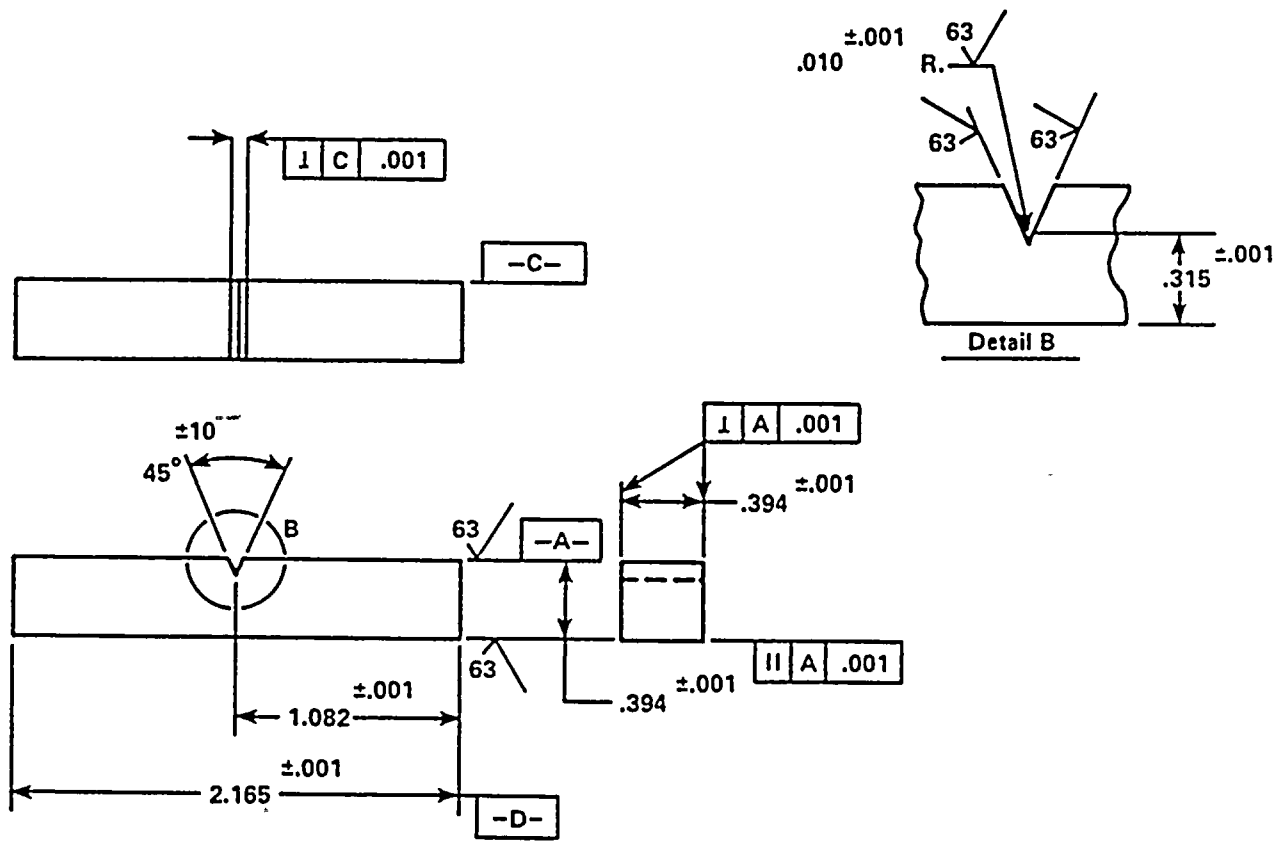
Drawing Showing Charpy Test Specimen Geometry
